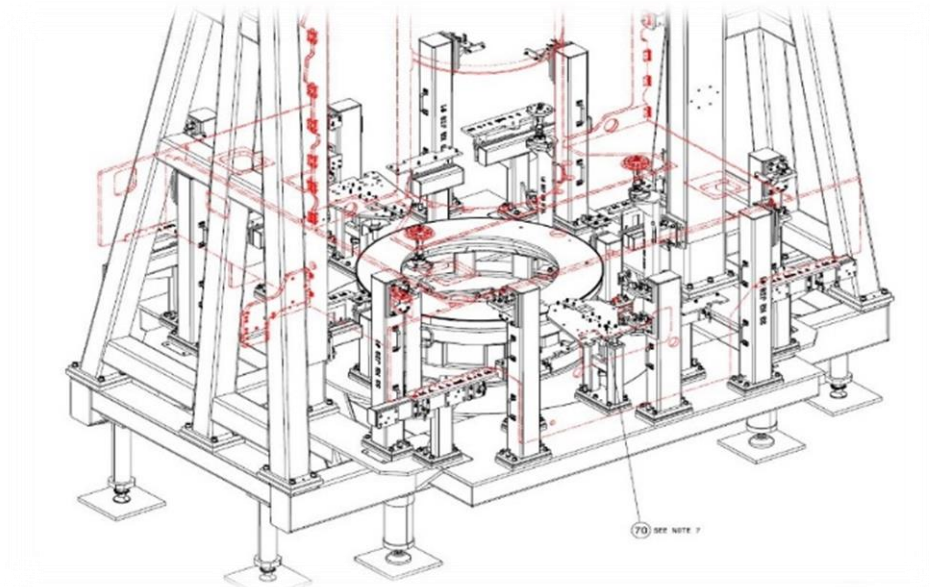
Extract from current E3000 SML2/3 assembly jig showing complexity of tooling design, setting and verification requirements.
